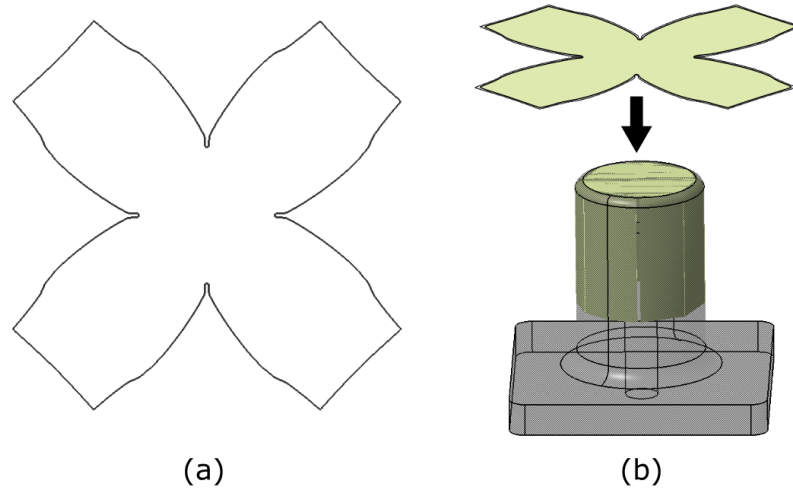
(a) Composite layup design for the demolding test and (b) schematic drawing of ply laid up on the demolding test tool.
